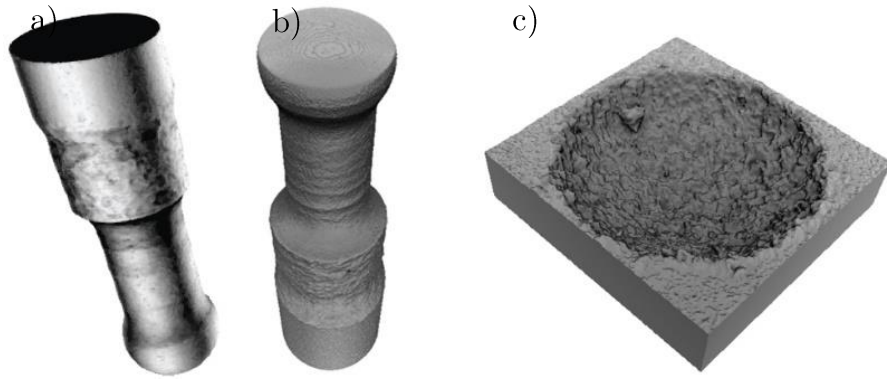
3-D mesh of the experimental tool. a) before and b) after machining.
